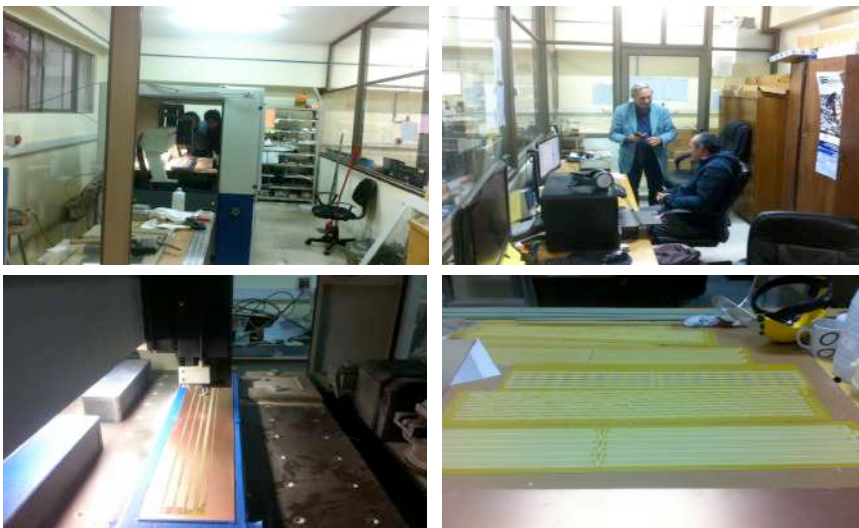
Left top picture is a photo of DATRON 5D CNC machine area. The right top picture is a working place of a mechanical engineer. The left bottom picture shows production of a part of sTGC with the CNC machine. The right top picture shows a final product for sTGC.
